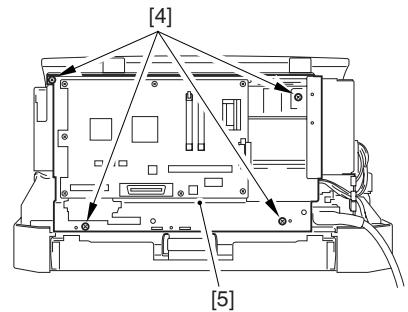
B. Video Controller PCB1. Removing the video controller PCB unit
